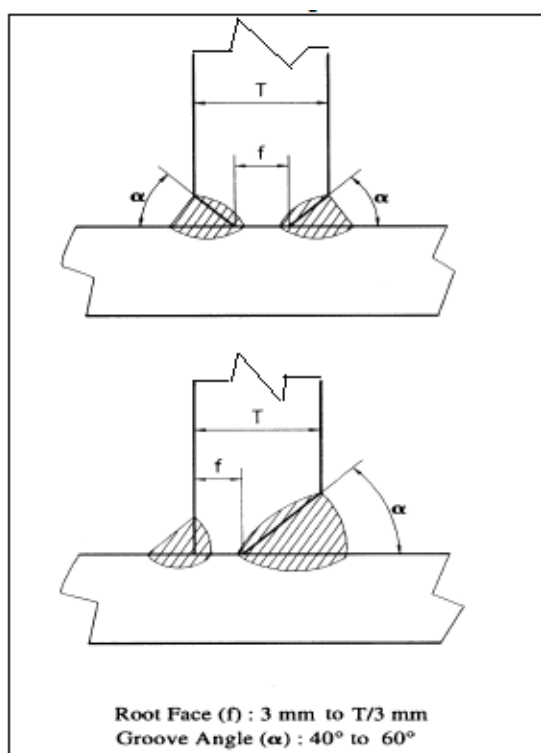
Full Penetration Or Deep Penetration Welds
